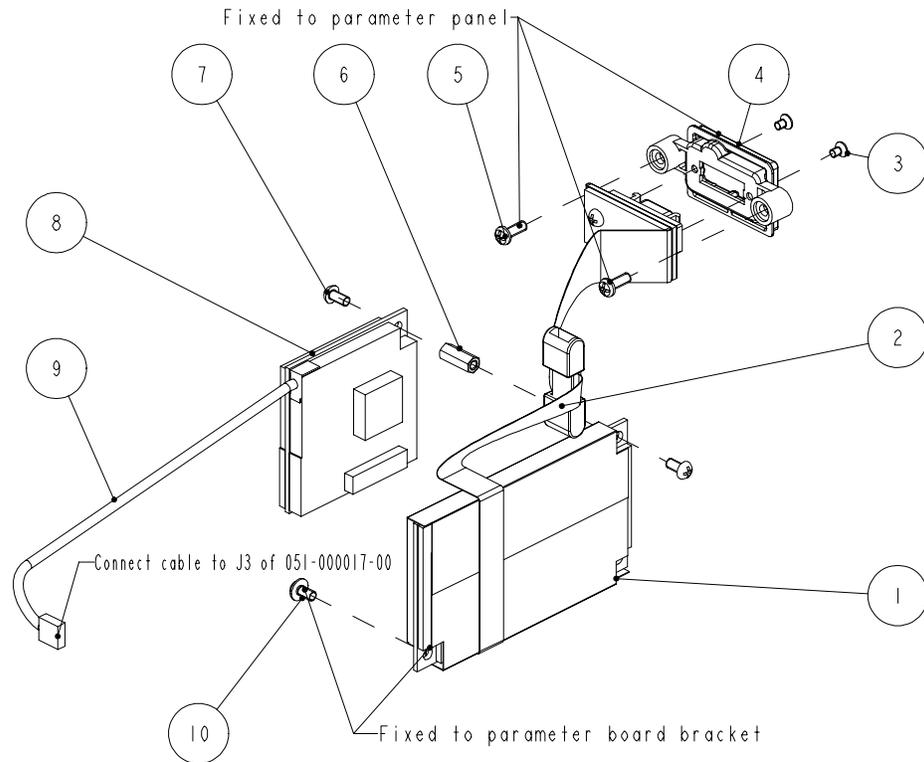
Nellcor SpO₂ Module Assembly
